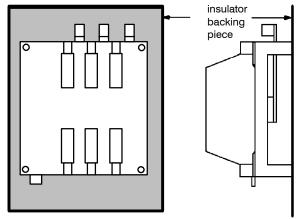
Insulator for 225, 260, & 400 amp. E–design transfer switches.
